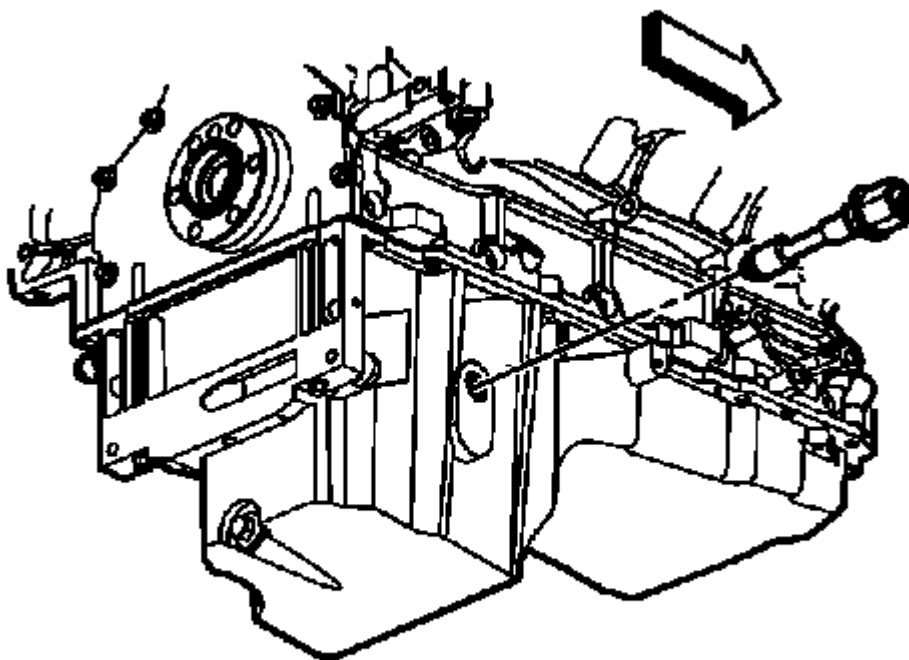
View Of Oil Pan Drain Plug & Seal
